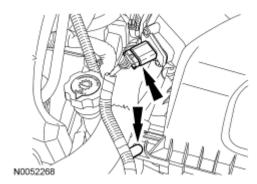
Locating Brake Booster Vacuum Hose Courtesy of FORD MOTOR CO.
